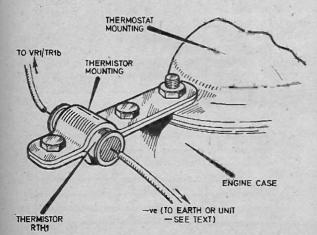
Method of mounting the thermistor to the thermostat housing on the engine. This may vary with different engines.
